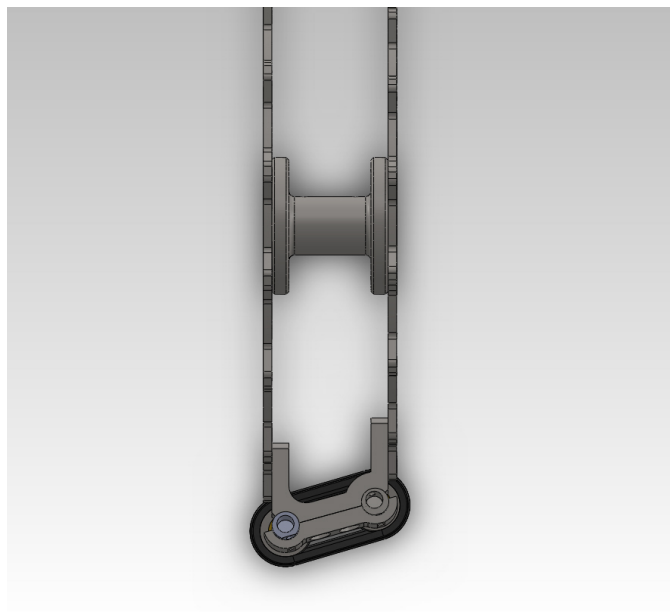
Front view of the inner layer frame and tracked-roller construct. The U-shaped upper part of the clamp connects the lower clamp and side frames together.
